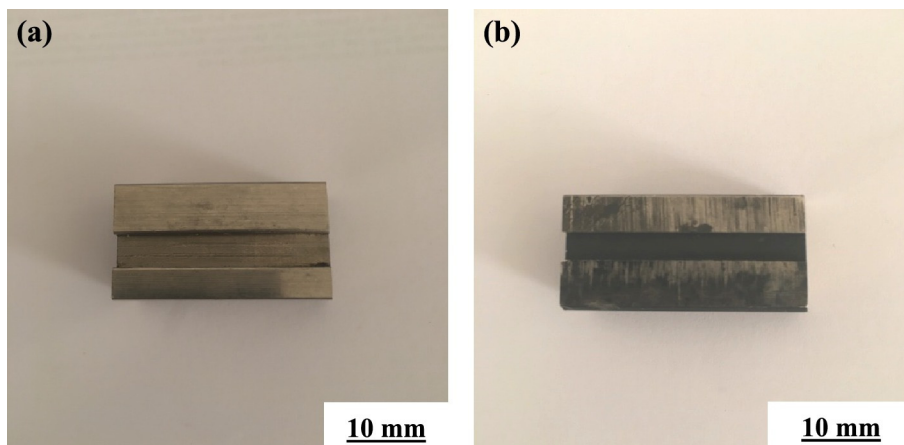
Specimens cut from: (a) New seal ring; (b) Used seal ring.
